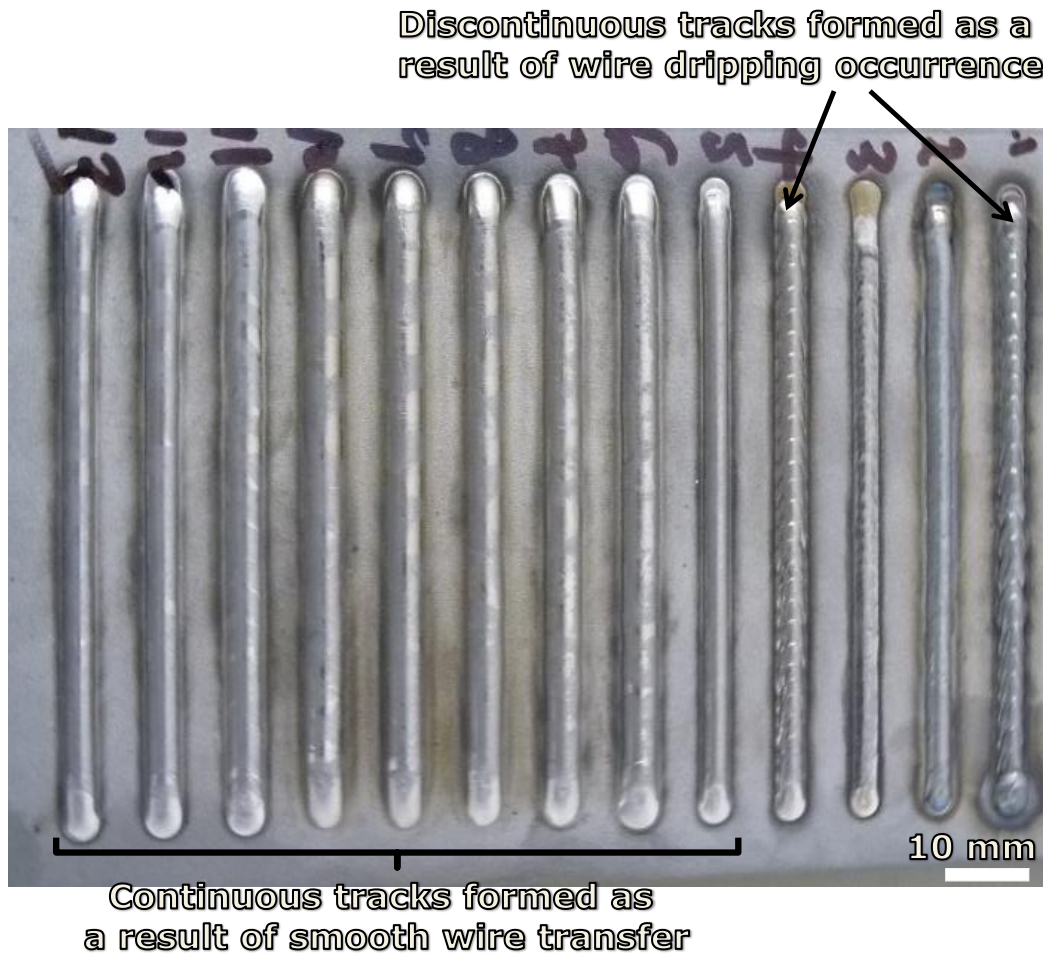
Examples of Inconel 625 wire single laser tracks deposited within the process window
